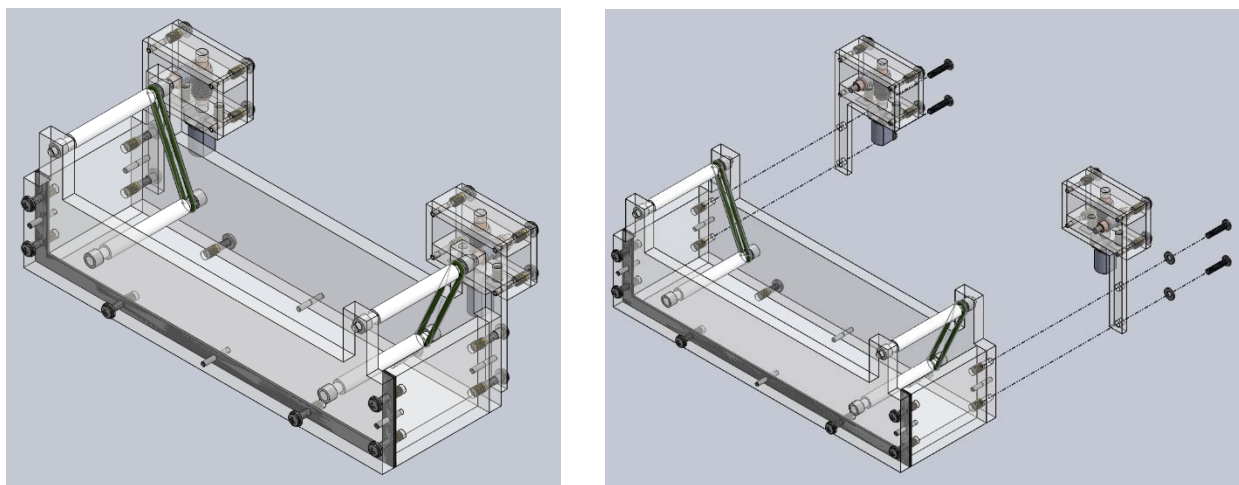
(a) Bath assembly and (b) exploded bath assembly
